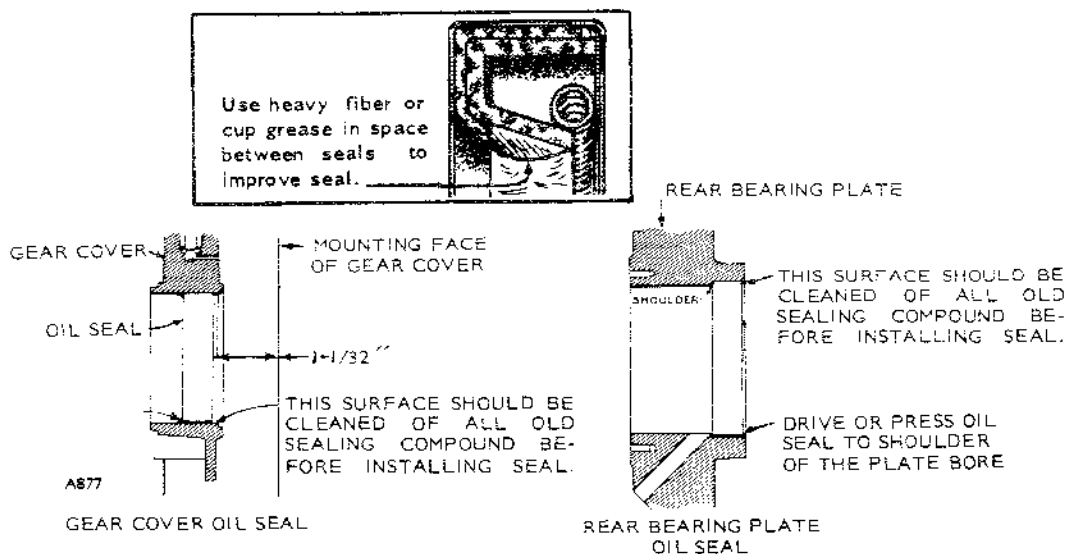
GEAR COVER AND REAR BEARING PLATE OIL SEALS
